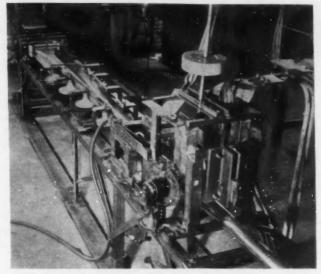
Experimental welding of black steel plate into tubes for can bodies at Battelle Memorial Institute
